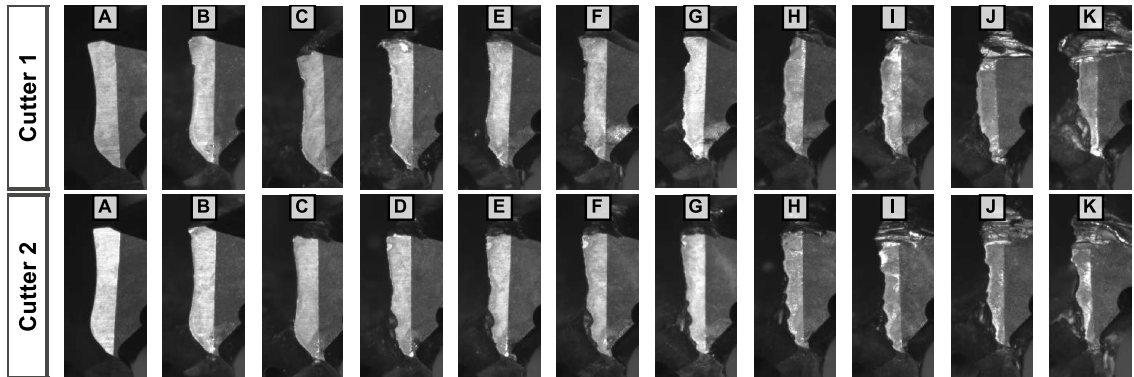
RTF 1 (1) drill-bit cutters flank wear images.
